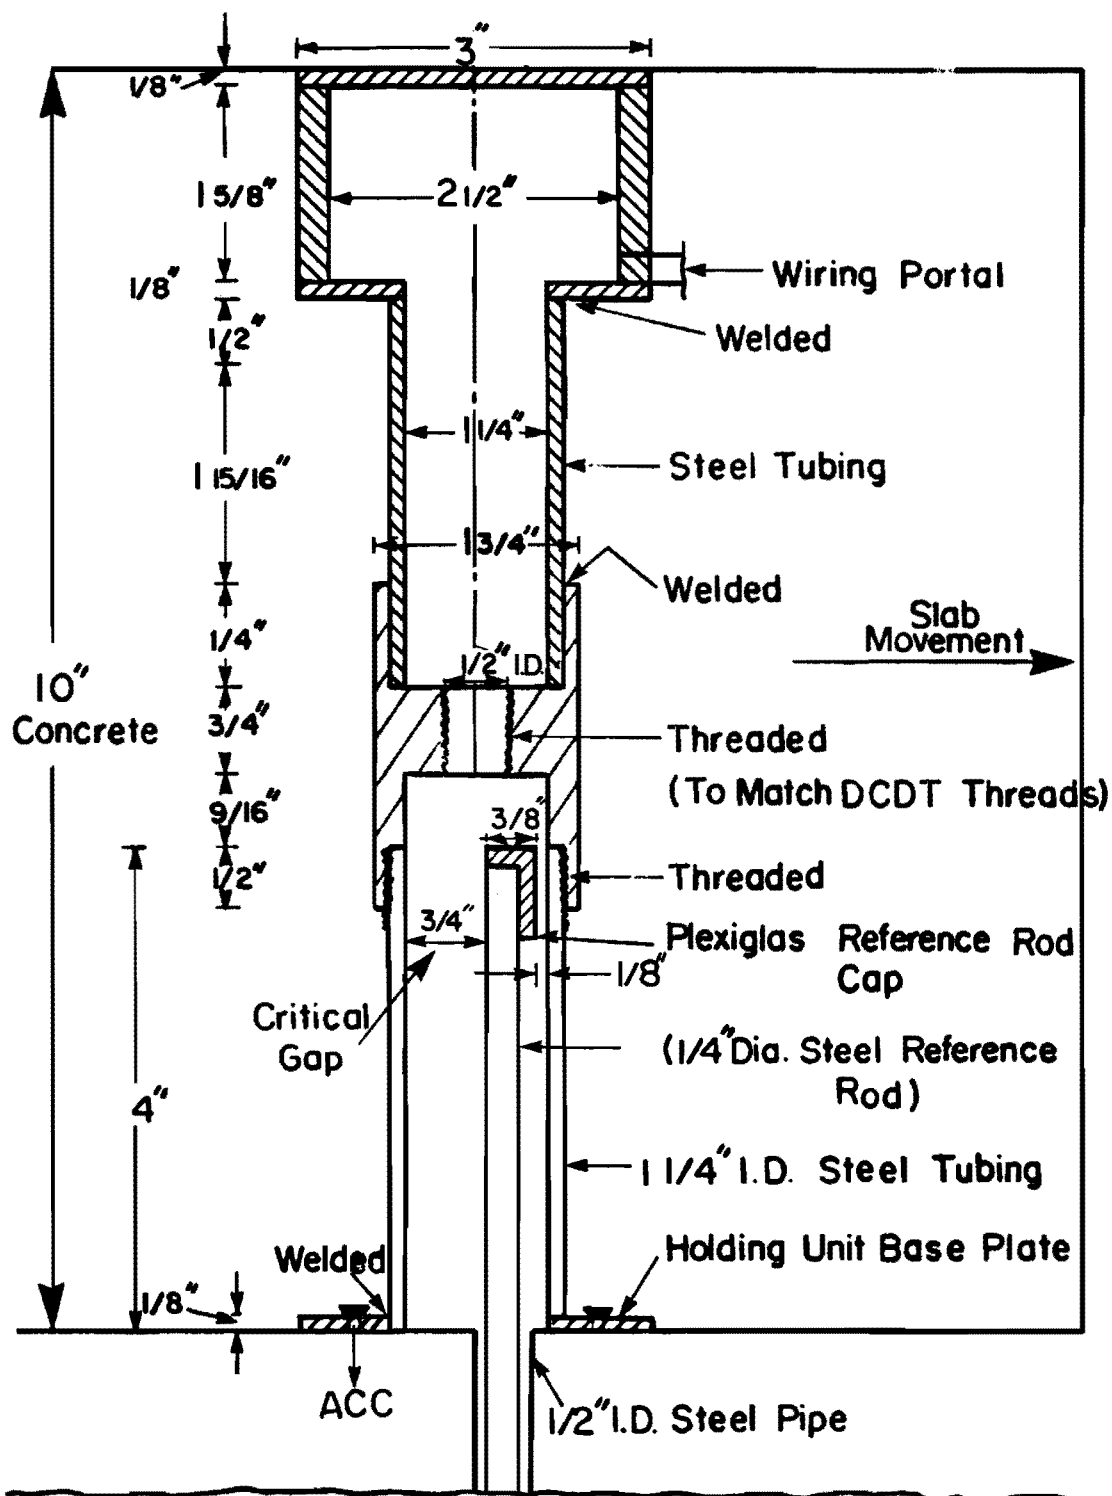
Typical cross section of DCDT holding unit (short slab).
